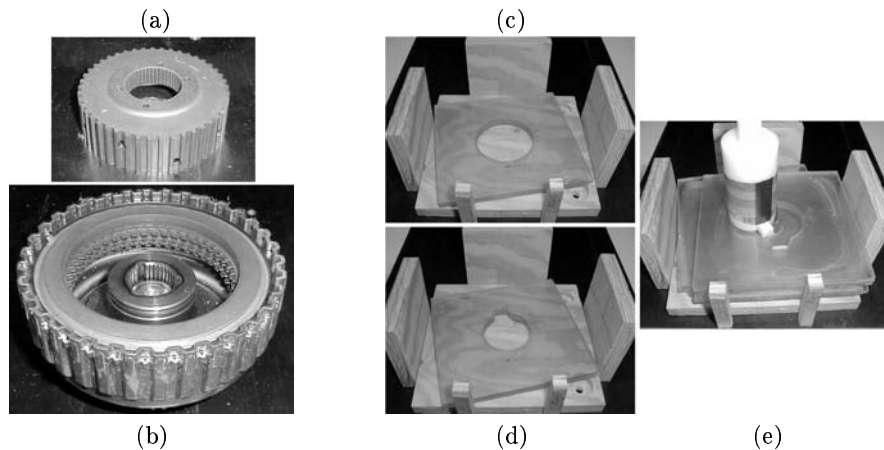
(a,b) Forward clutch assembly; (c,d,e) Peg and layers in the prototype peg-in-maze assembly
